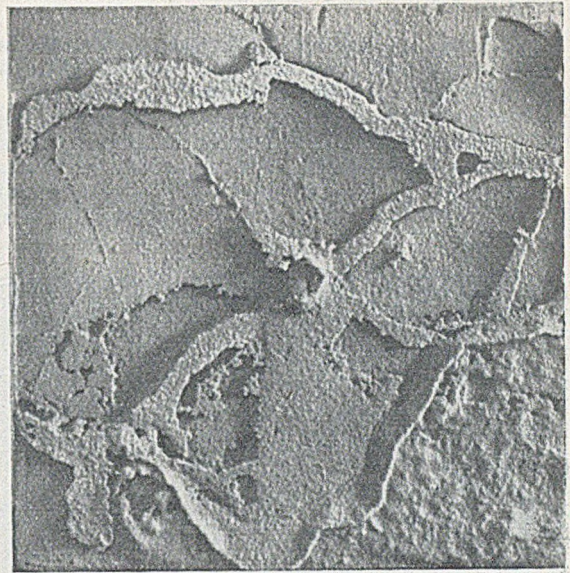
Similar Test-plate Casting to Fig. 8, but made in Sand with 2.0 per cent. Wood-flour.
